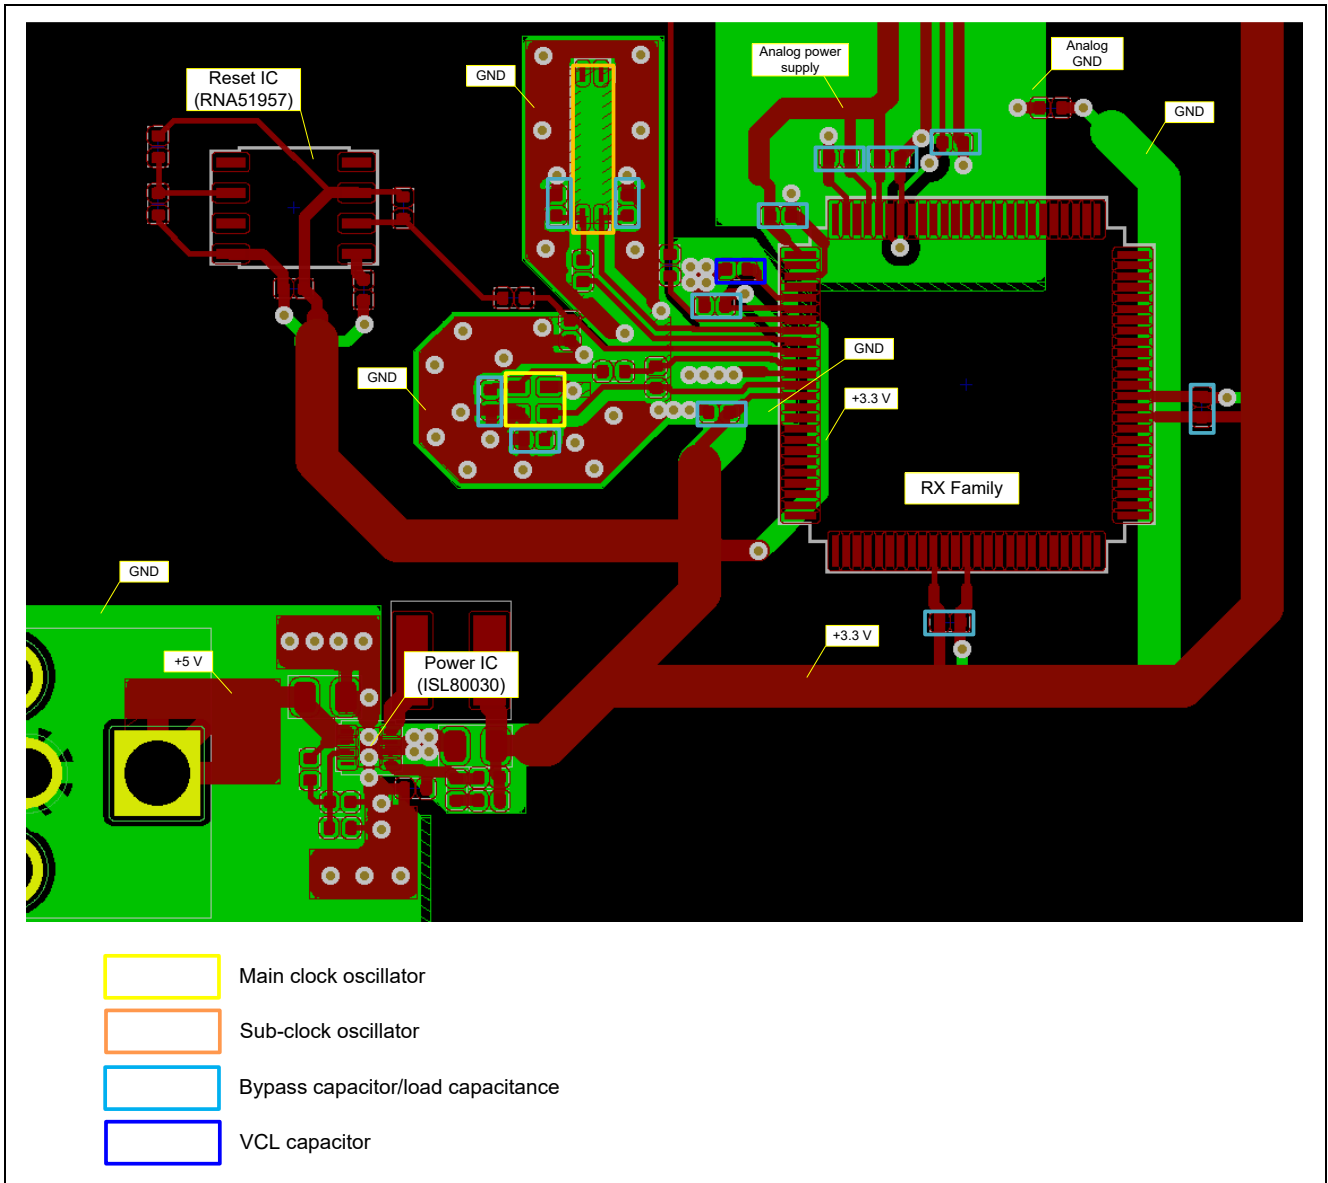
Example Board Wiring Pattern (Two-Layer Board)
